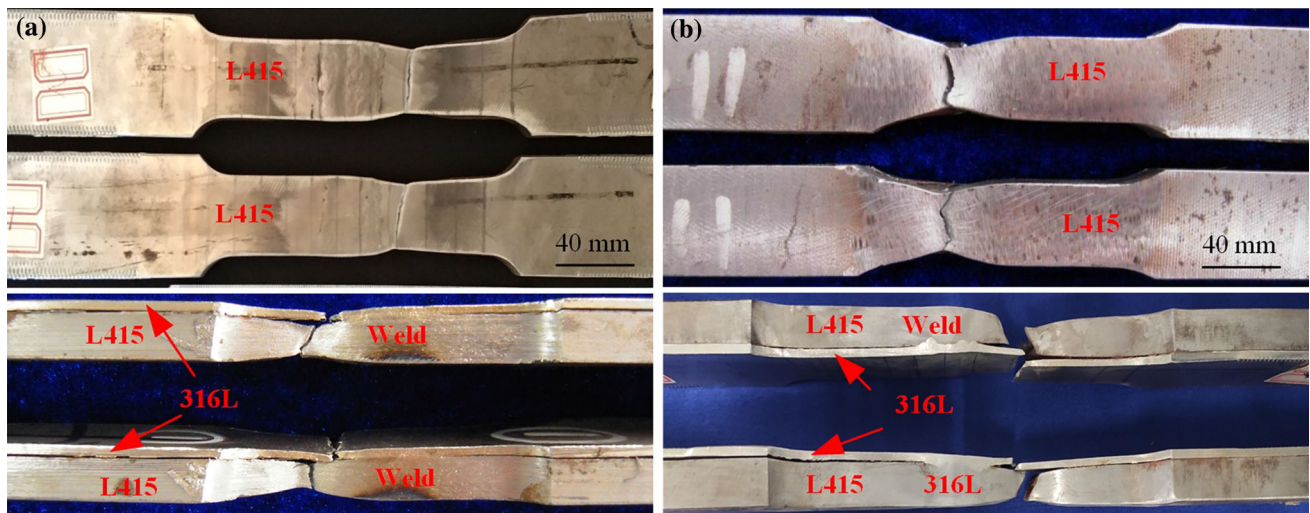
Macromorphology of tensile specimens a 309MoL; b 309L
